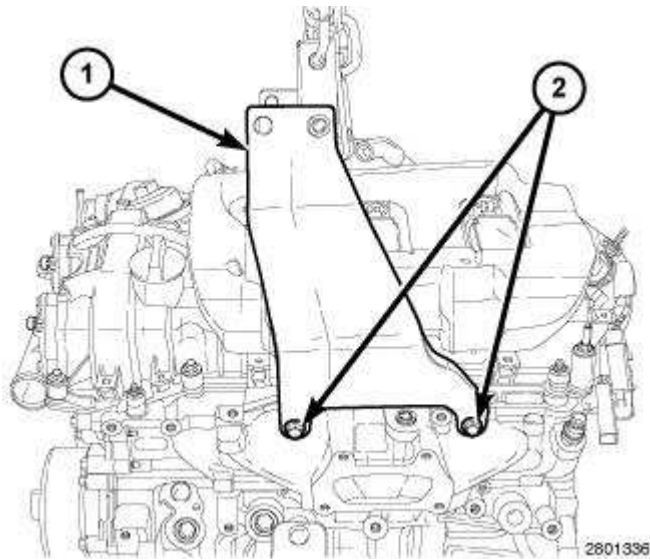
Driver Side Engine Lifting Bracket & Bolts
